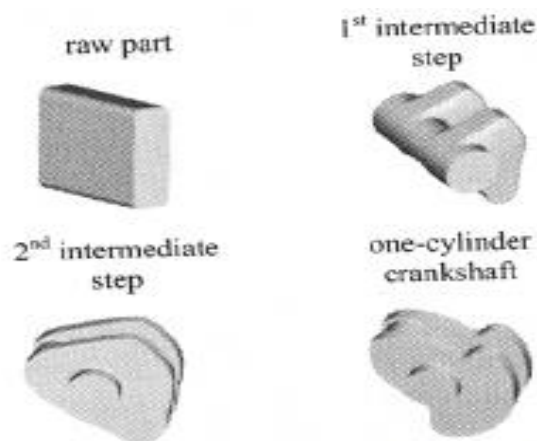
Forging sequence for a one-cylinder crankshaft
